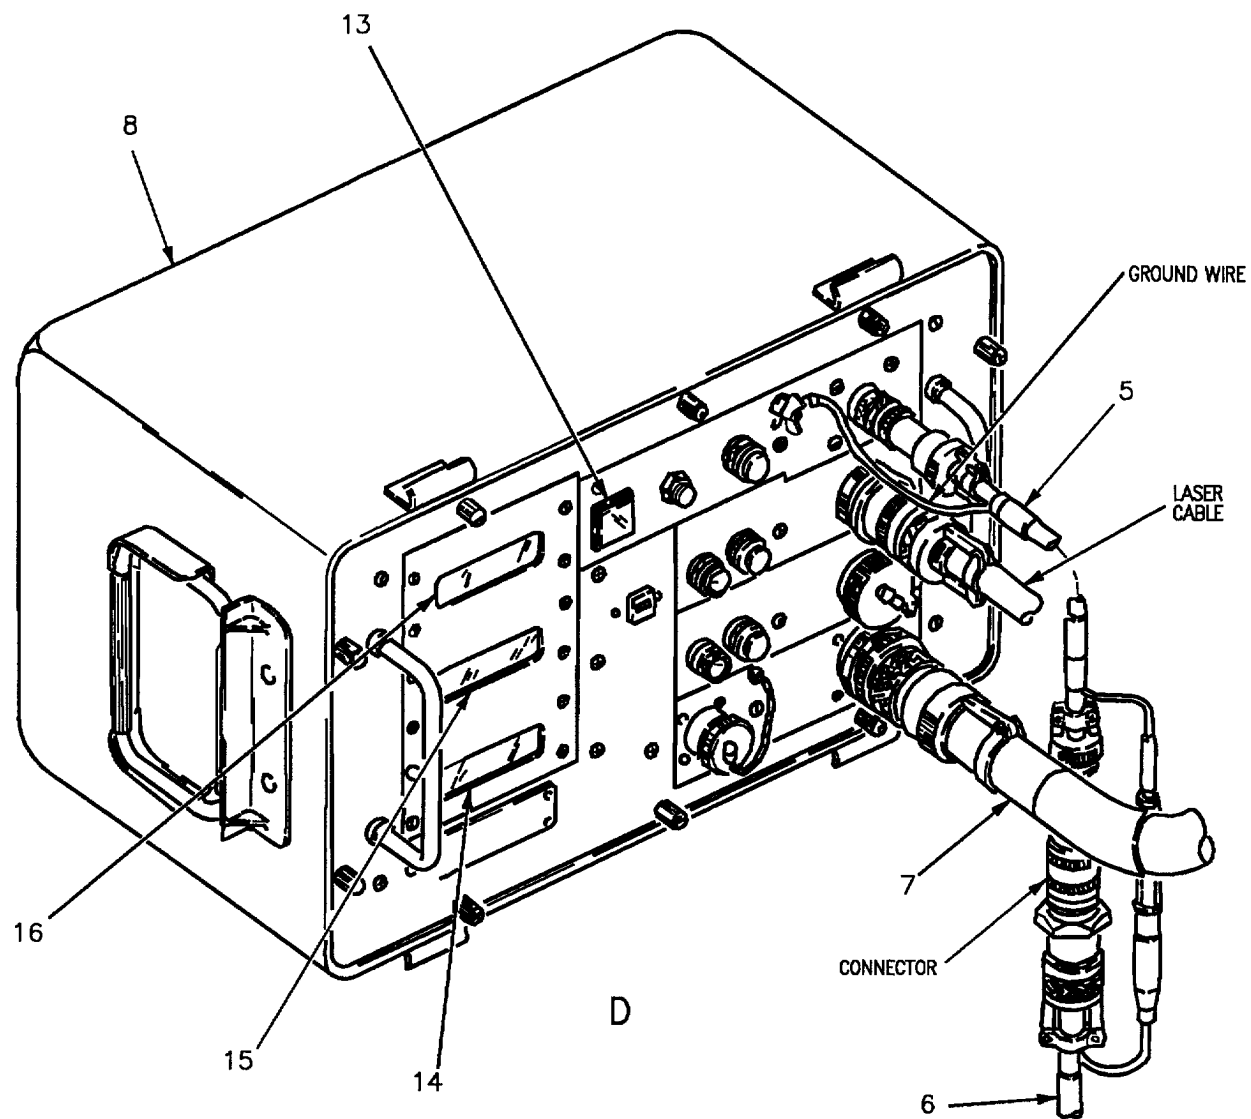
Triaxial Alignment Set Check Fixture (Sheet 4)
